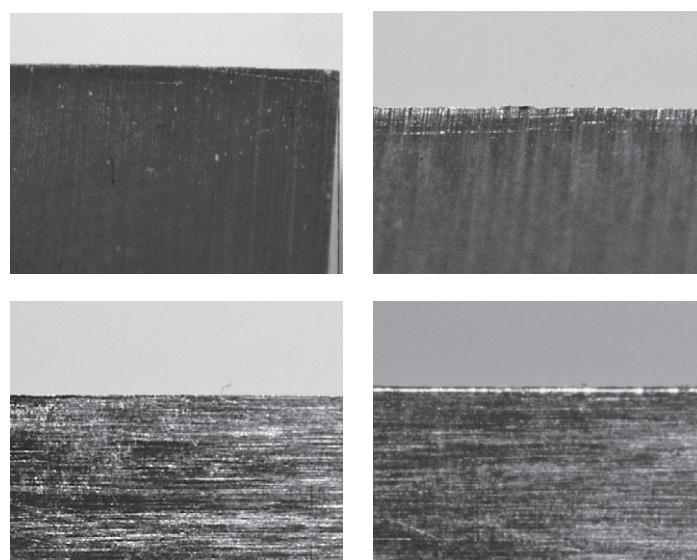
Cutting edge wear samples: cutting distance of 0 (left) to 10000 meters (right) Clearance Face (above) and Rake Face (below)
